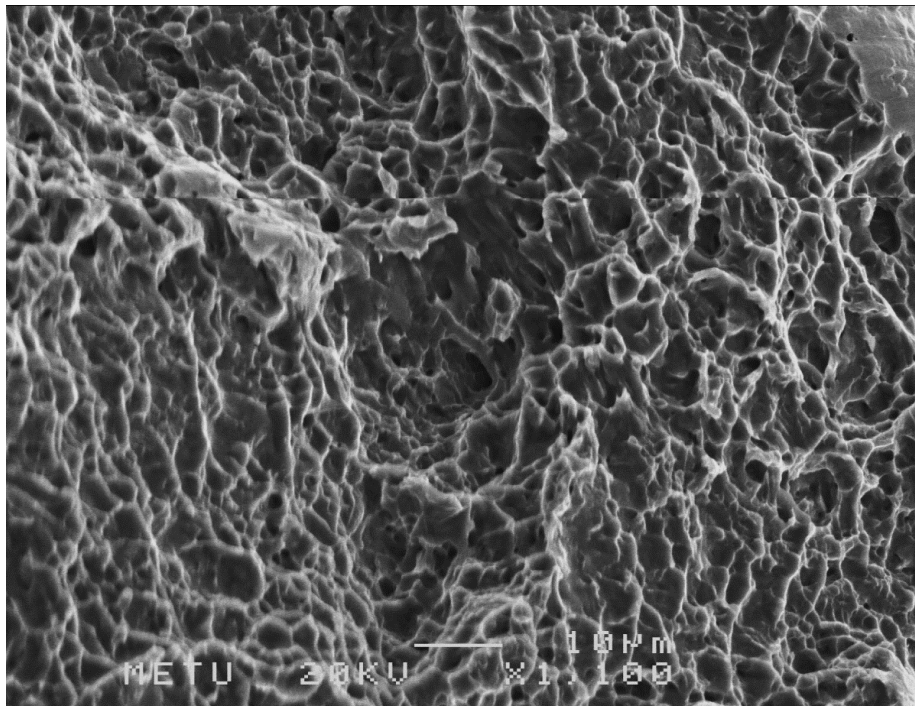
Ductile fracture surface at 1100X magnification for 30T
